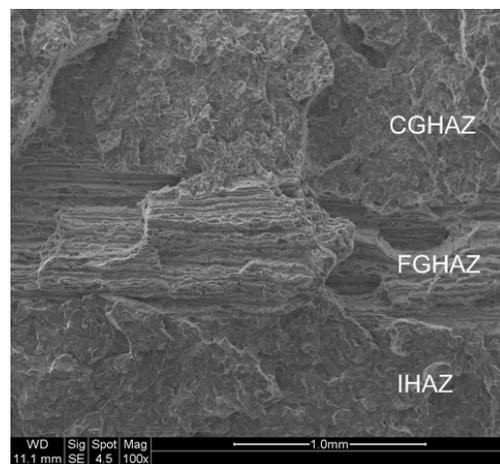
SEM fractography showing fracture features of specimen after seventh rewelding at -40°C temperature test (for abbreviations see Fig. 2)
